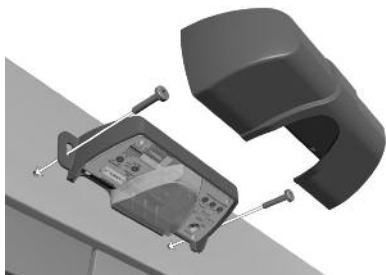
Use the self-adhesive drilling template for correct mounting holes and cable connection
